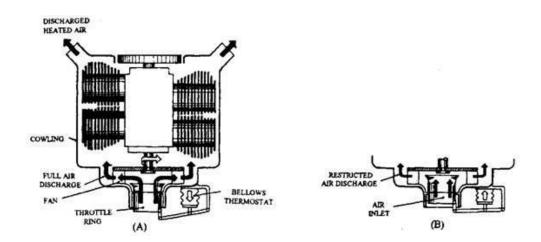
Air-cooled engine with fan discharge control. A. Thermostat opens the throttle ring. B. Thermostat closes the throttle ring.
